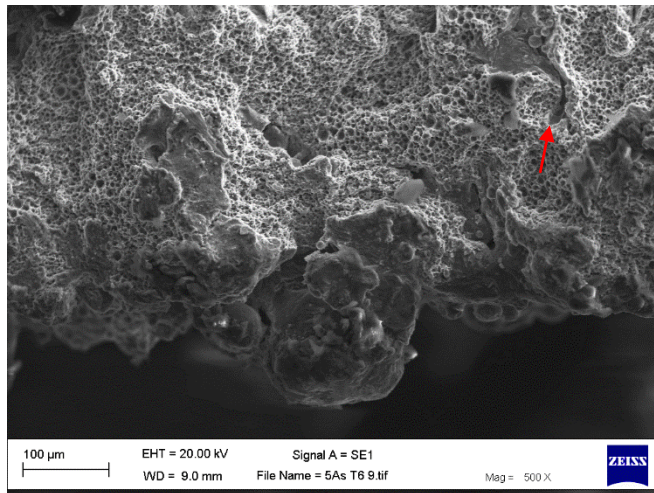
Fracture surface of 5-AS T6 Al-MMC
